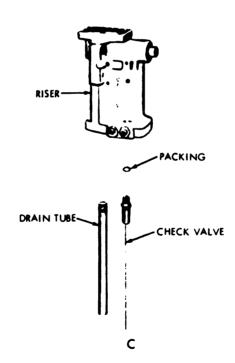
Manual elevation pump check valve and reservoir oil drain tube removal or installation.
